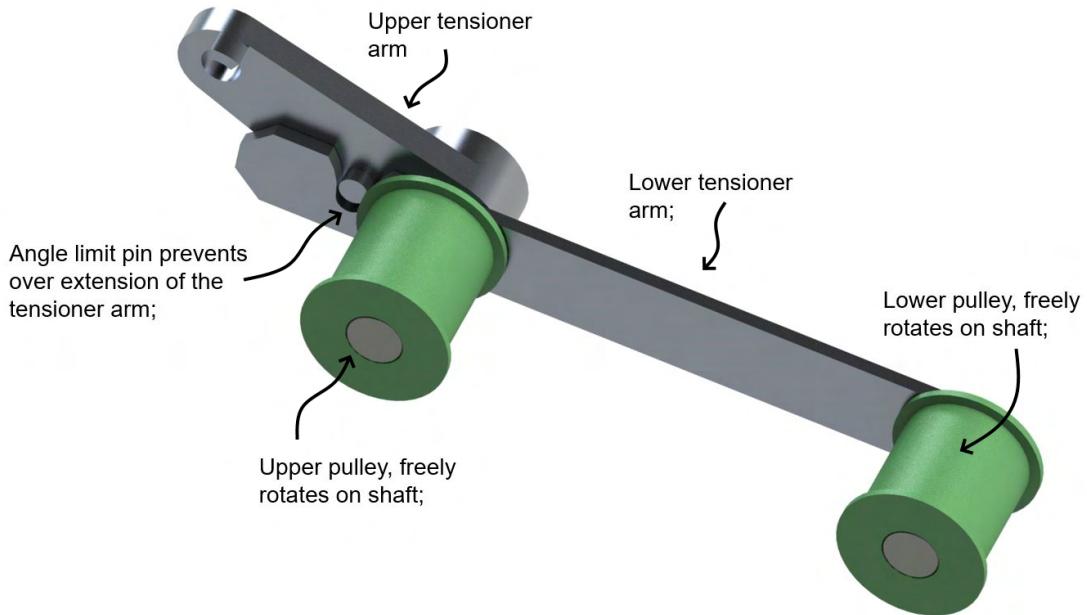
Annotated inside view of the tensioner sub assembly;
